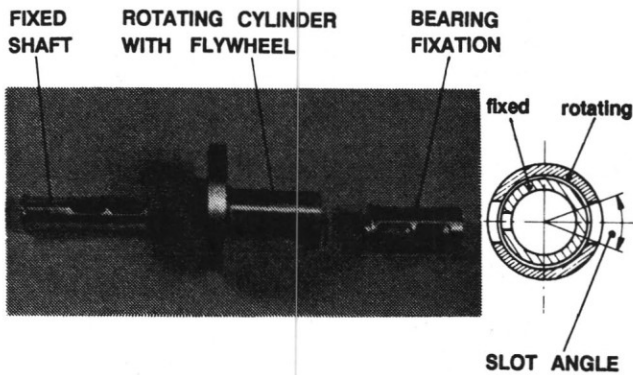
Fixed hollow shaft and rotating cylinder with flywheel
